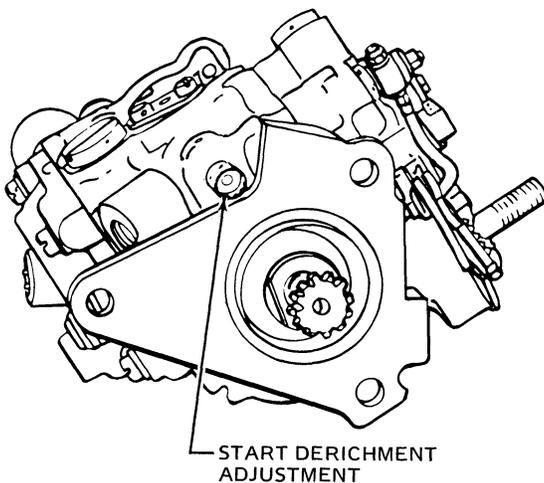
Bendix Gas Producer Fuel Control – Model 250-C20 Engine
